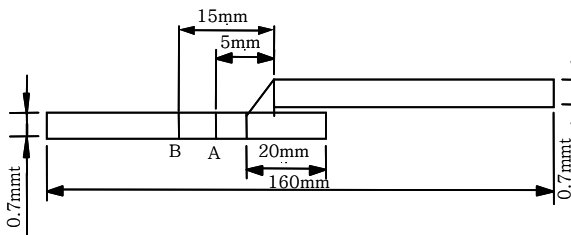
Dimension of test specimen and locations of thermocouple (A, B)
